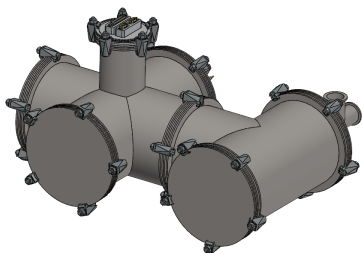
3D CAD Drawing: Vacuum Chamber Cross Section.
